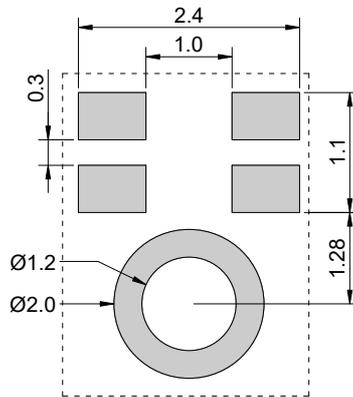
SDMO07D-36/1363 PCB Solder Pad Layout
